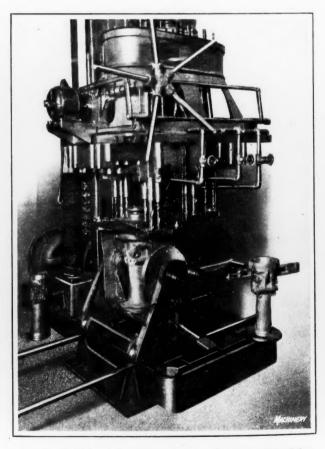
Multiple-spindle Drilling Machine and Fixture employed for drilling the Arms and Flange of the Axle Housing
